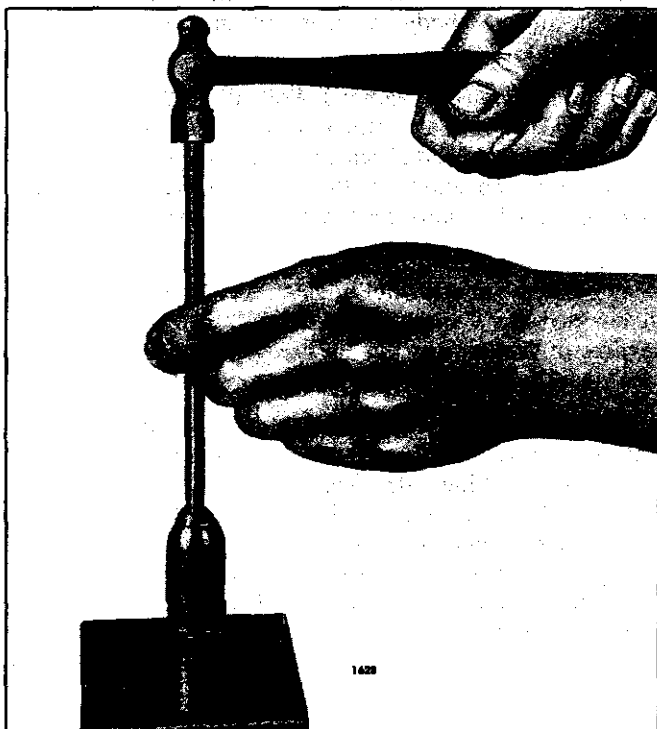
Removing Spray Tip from Injector Nut Using Tool J 1291-02
